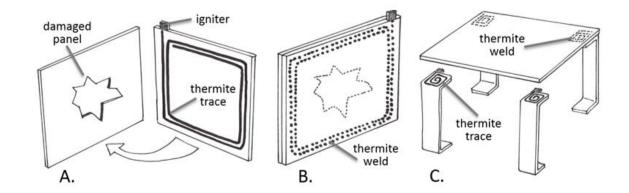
A) and B) A pre-printed thermite trace is used to rapidly repair a damaged panel. C) Pre-printed thermite traces assisting in rapid assembly.
